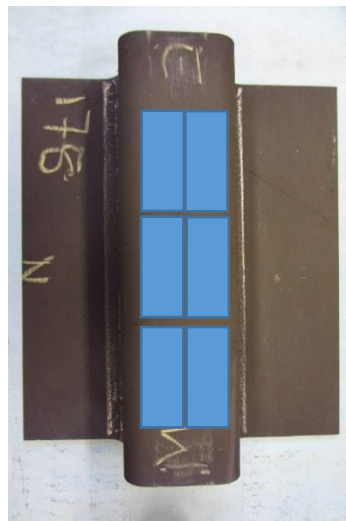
Figure showing the location of machined tensile specimens from the top hat section
